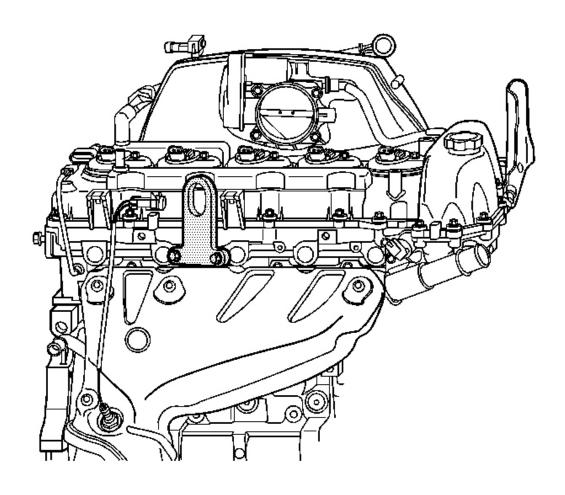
Identifying J 44220 Courtesy of GENERAL MOTORS CORP.
